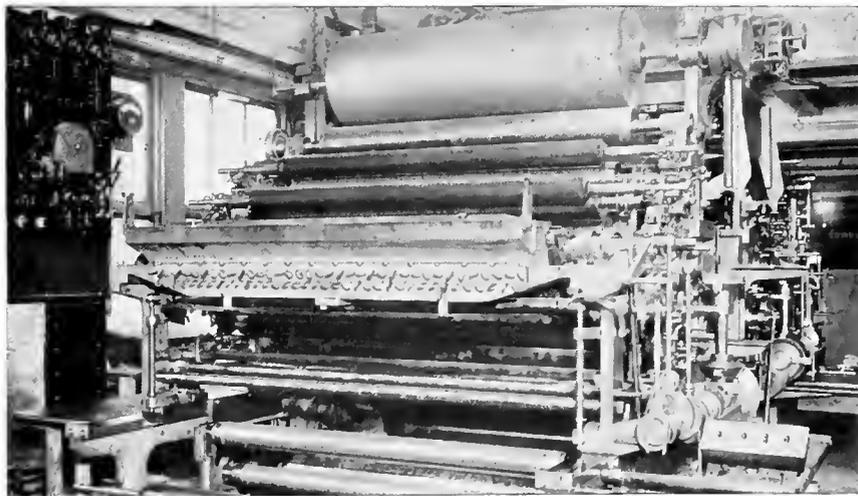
Hoe Rotary Magazine Press Driven by 15 H.P. Direct Current Motor with Full Automatic Single Motor Controller
